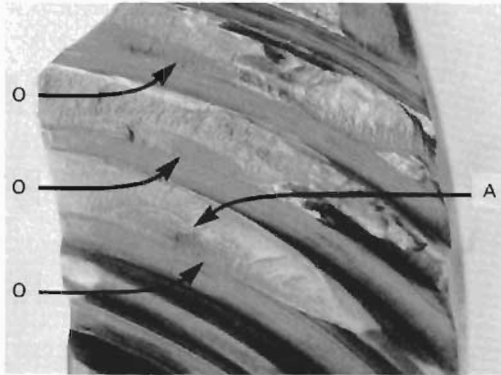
(c). Of the 15 teeth that failed by tooth bending fatigue, two fractures intersected a bolt hole (see Fig. 6-2a and 6-2b). Four other fractures touched the apex (A) of a bolt hole. Nine teeth failed by tooth bending fatigue completely away from a bolt hole. All 15 have an origin (O) in the same relative position.
